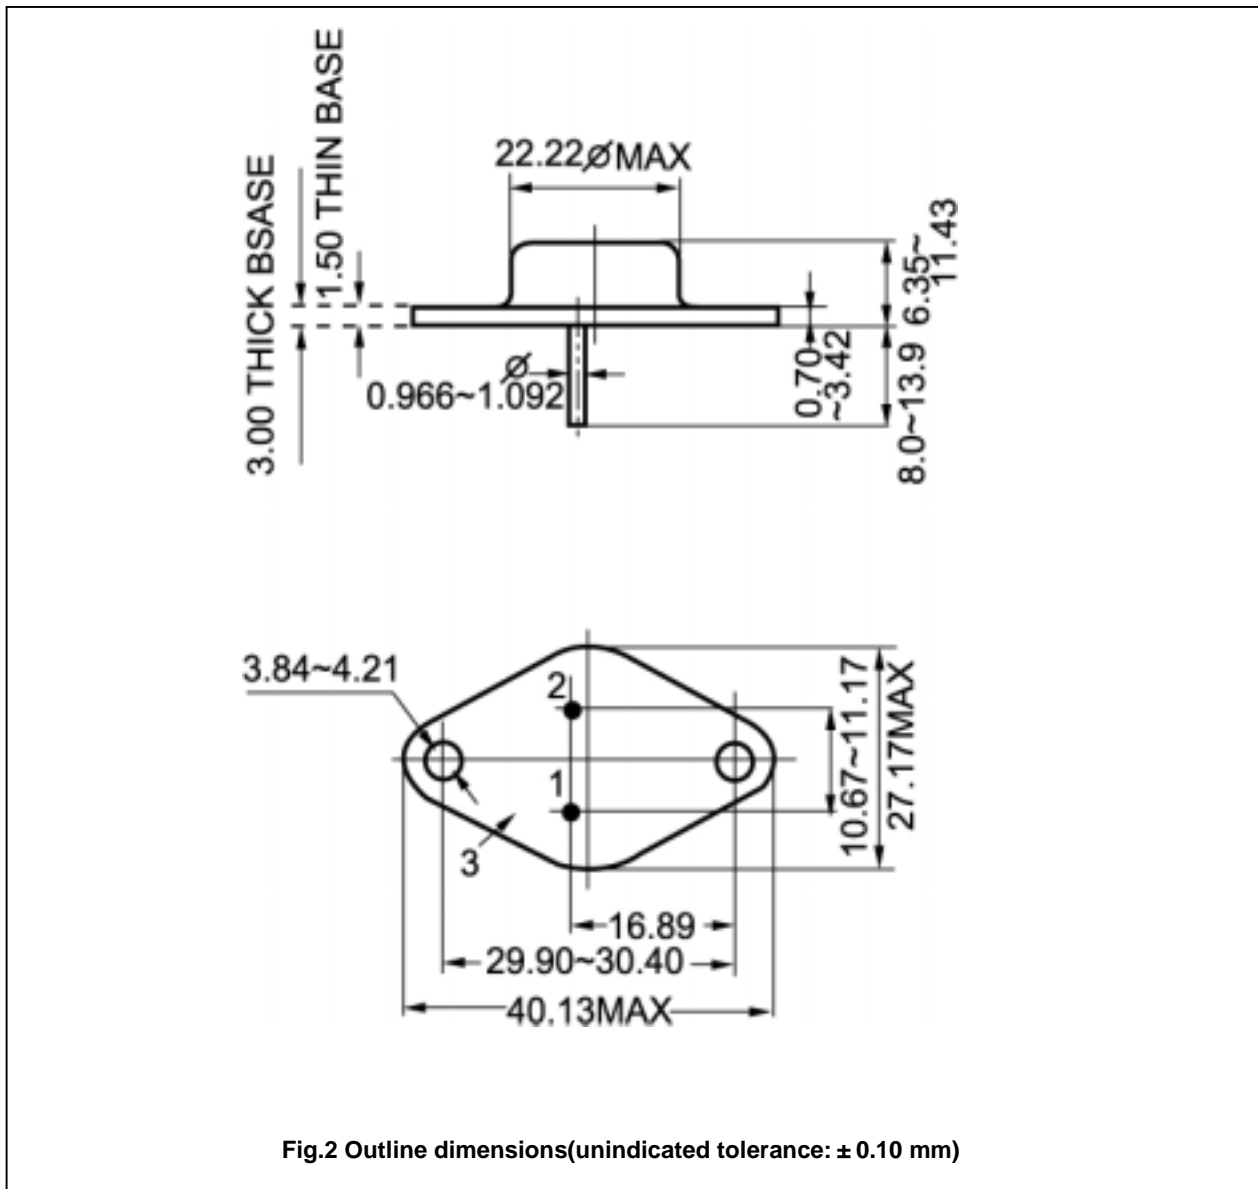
Outline dimensions(unindicated tolerance: ± 0.10 mm)
